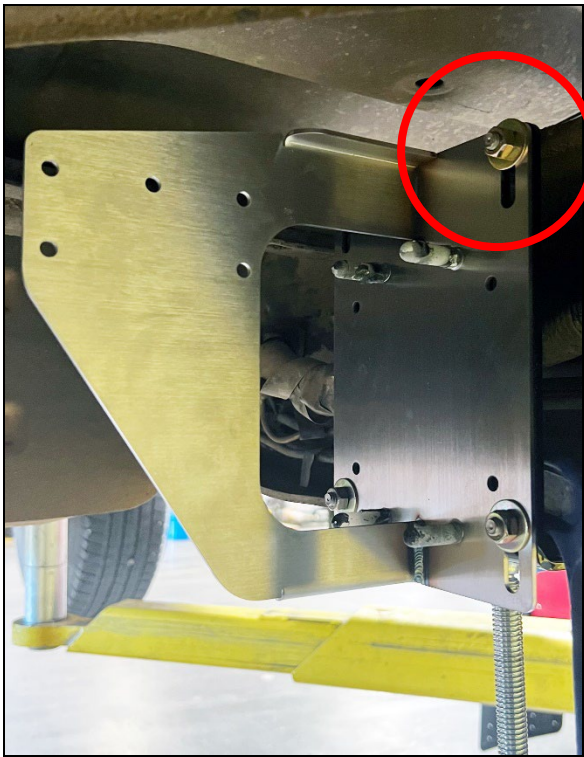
Pump Outlet View – “Inside the Frame” Orientation
